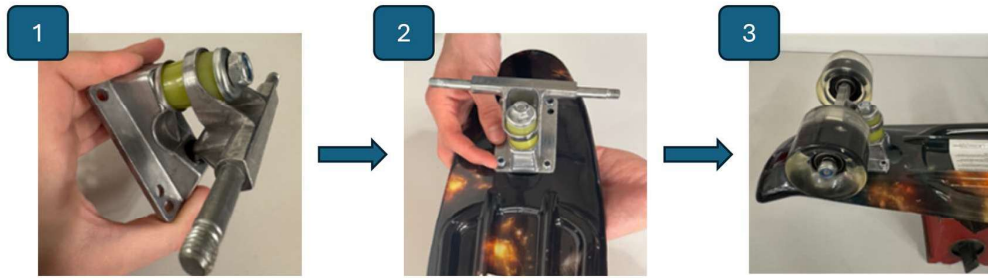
The three phases of the assembly of the skateboard: (1) truck assembly; (2) trucks on the board assembly (3) wheels and trucks assembly.
